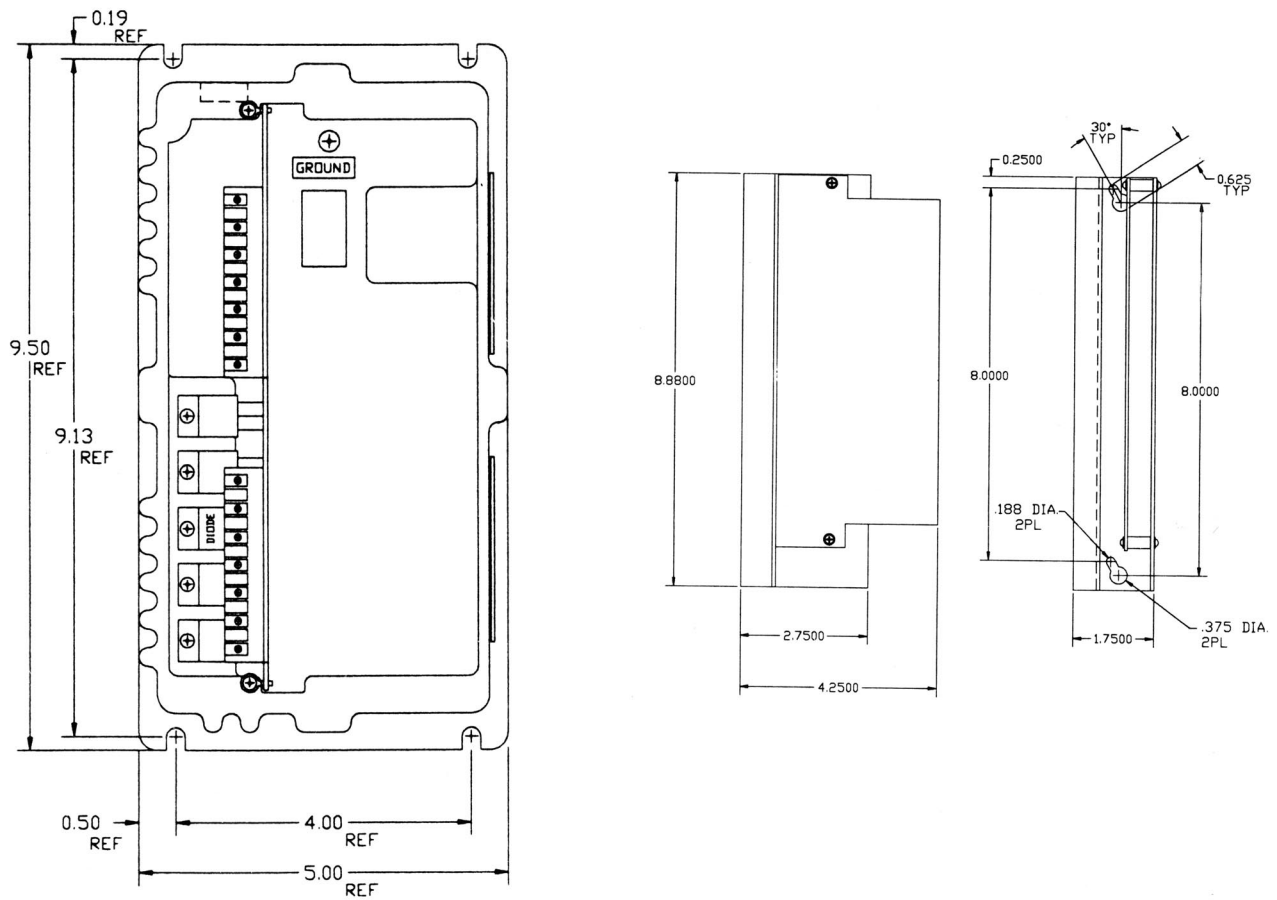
MOUNTING DIMENSIONS, BETAplus
